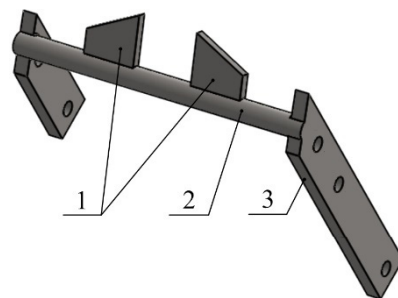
Spike segments: 1—spikes; 2—horizontal rod; 3—side steel strip.
